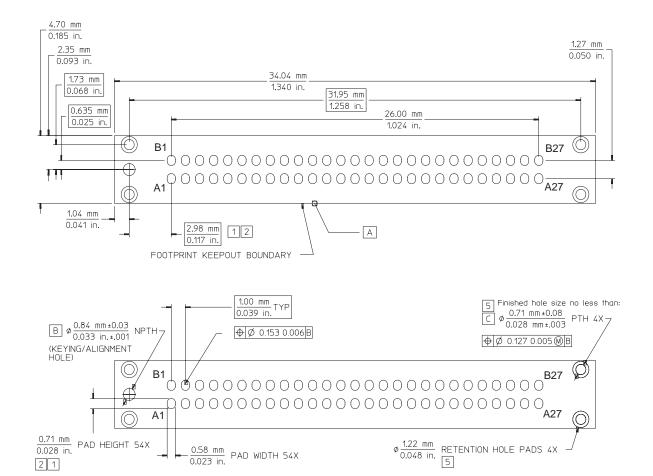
U4204A Top view footprint dimensions (drawing notes below).
